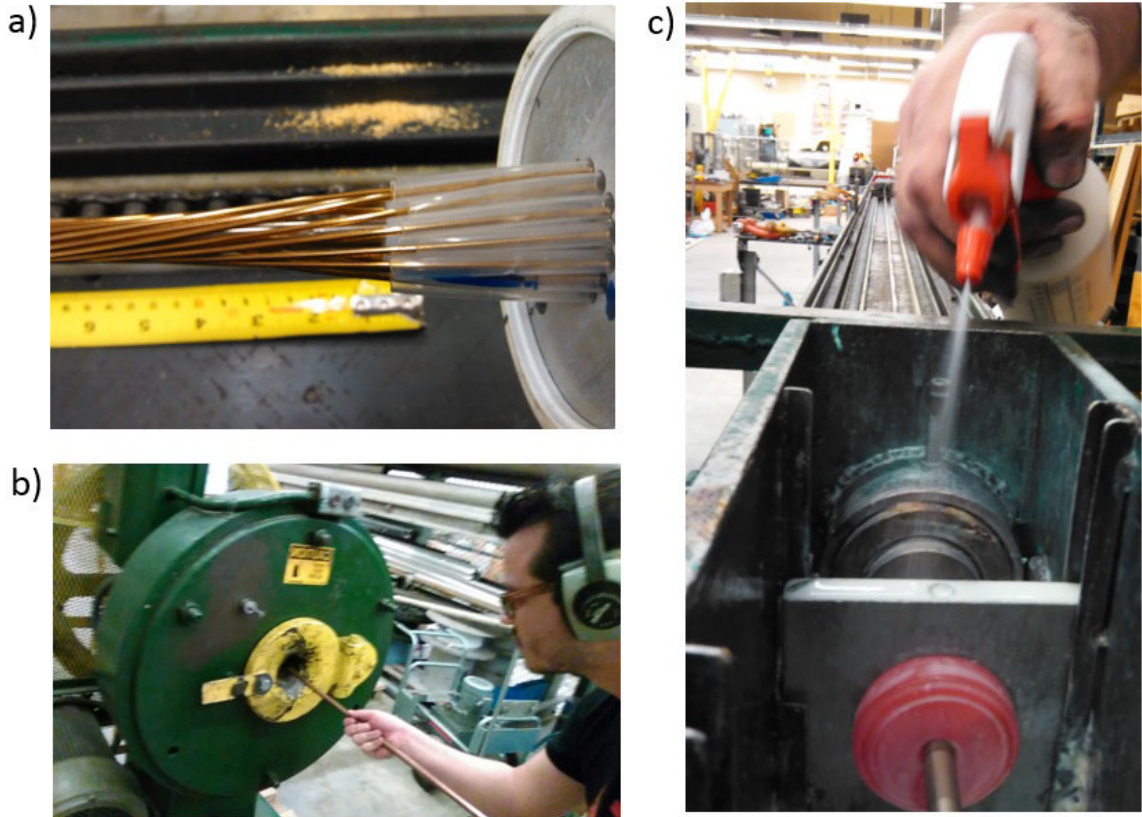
CIC conductor short-sample development process. On a), a hand-stranding machine for cable the superconductors around the inner tube. On b) a hammer-swagging machine used to point the CIC conductor, prior drawing process. On c) a two-stage drawing box drawing the CIC conductor.
